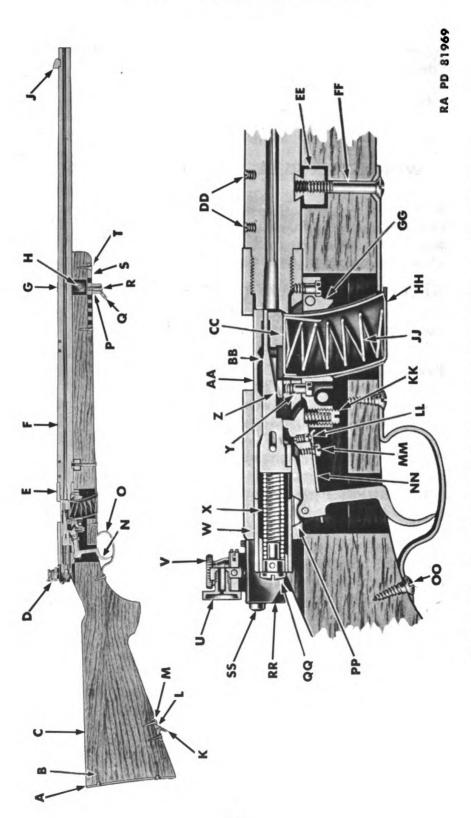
Winchester Rifle, Cal. .22, Model 75 – Sectional View
